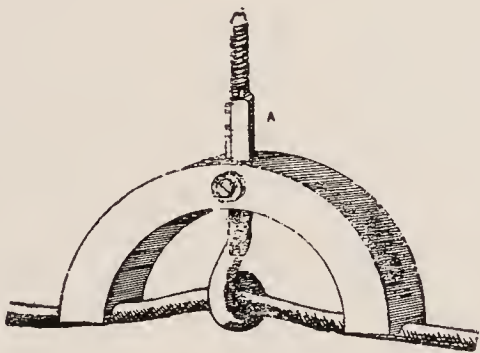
Tool used for bending bar of Thomas caliper splint.
